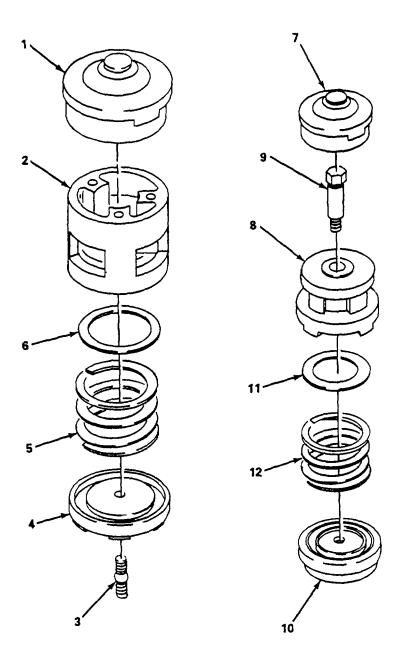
Compressor Intake, Discharge, and Intake Unloader, Repair.
